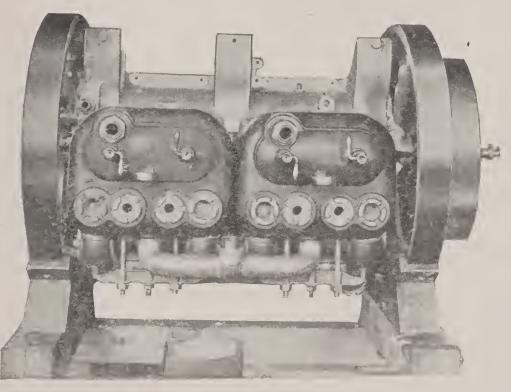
Top view of same Motor showing Valve Caps and Holes for Spark Plugs.
